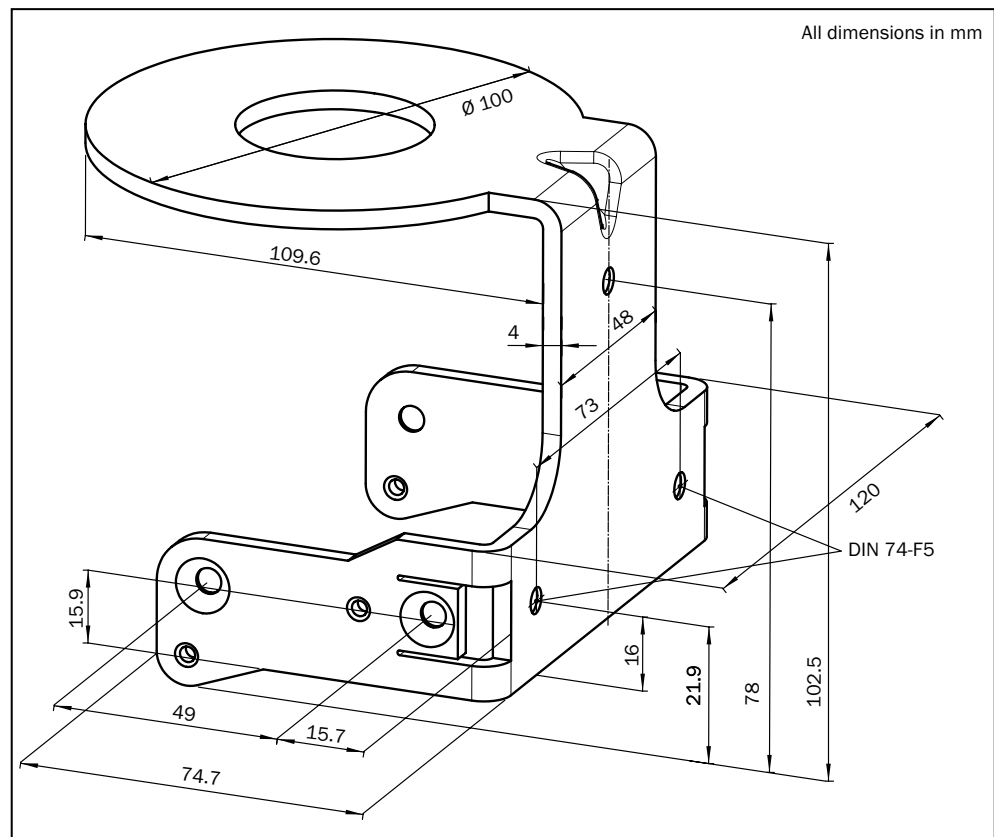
Dimensional drawing mounting kit 1b (part no. 2034325)
